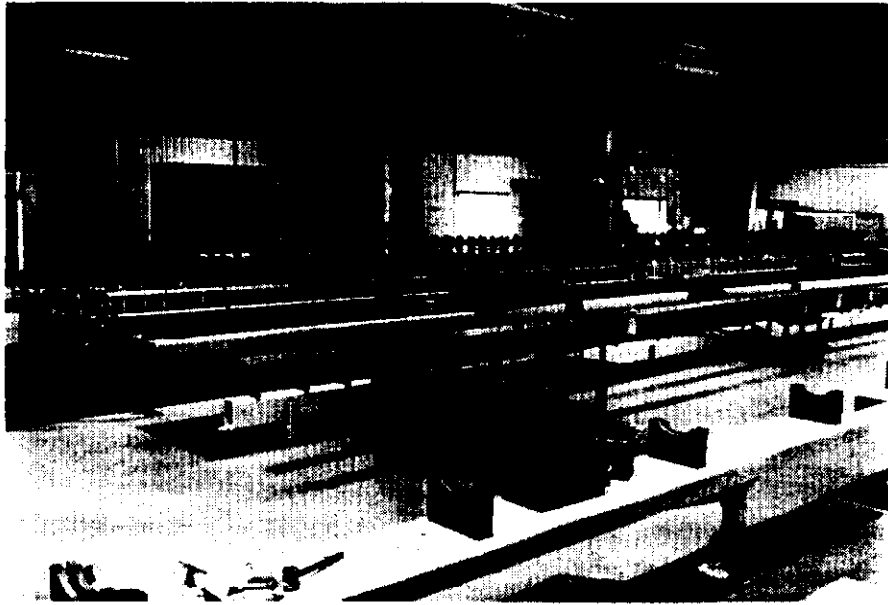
BNL curing press and molding fixtures for 4-cm aperture, 17-m-long collider dipole coils.
